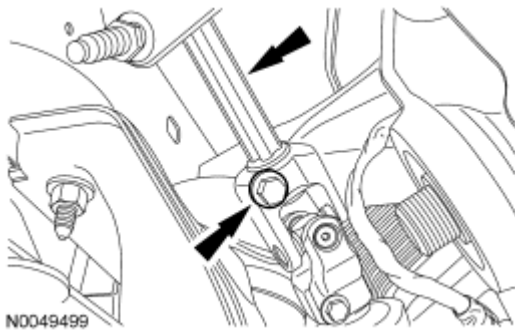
Locating Upper Bolt From Intermediate Steering Shaft
